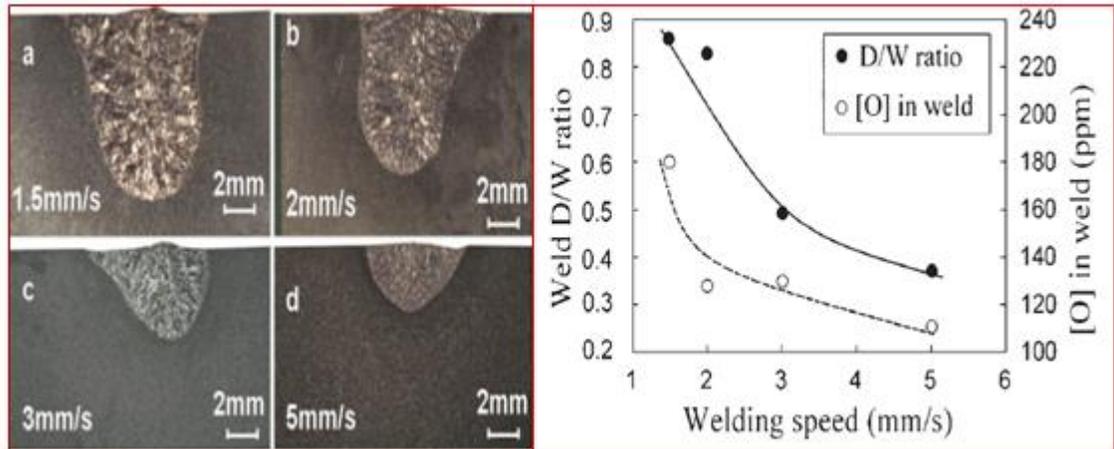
Effect of welding speed on weld pool shape, oxygen content in weld pool and D/W ration under different welding speed [83]
